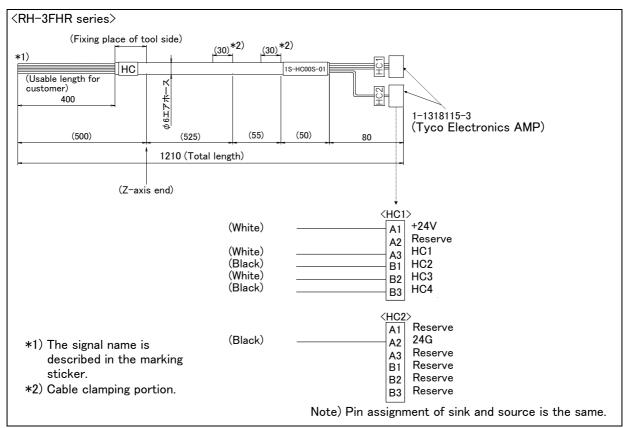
Outside dimensional drawing and pin assignment (RH-3FHR series)
